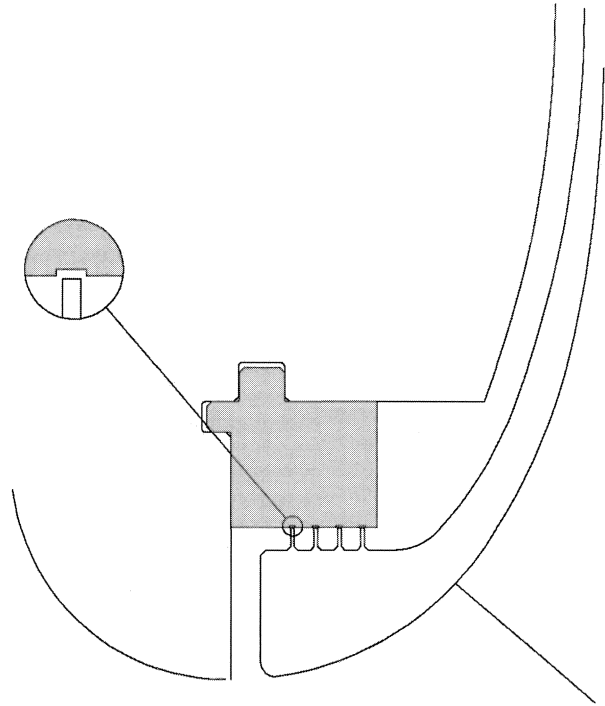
Abradable Type Impeller Eye Seal with Rotating Teeth.
